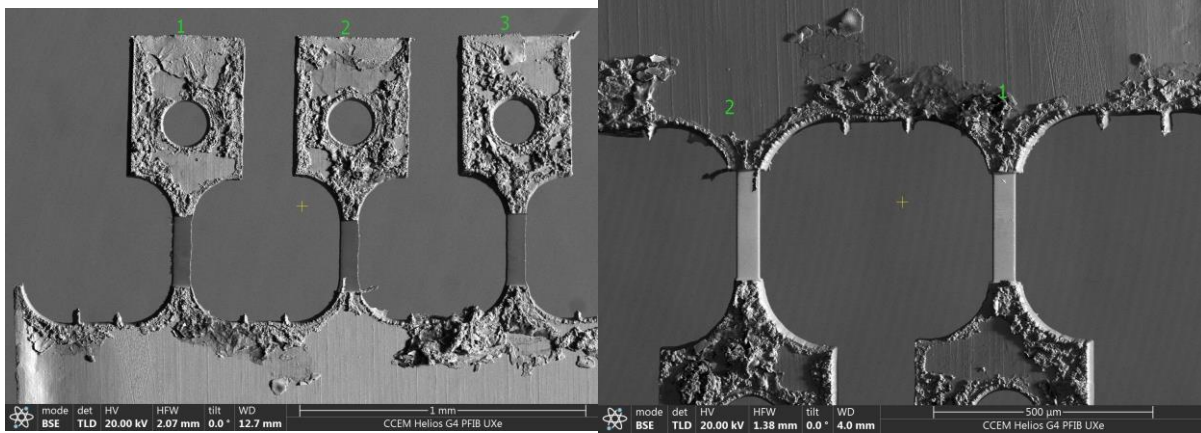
SEM images of fs-laser-machined specimens wedge 4 specimens before and after cleaning of gauge edges.
